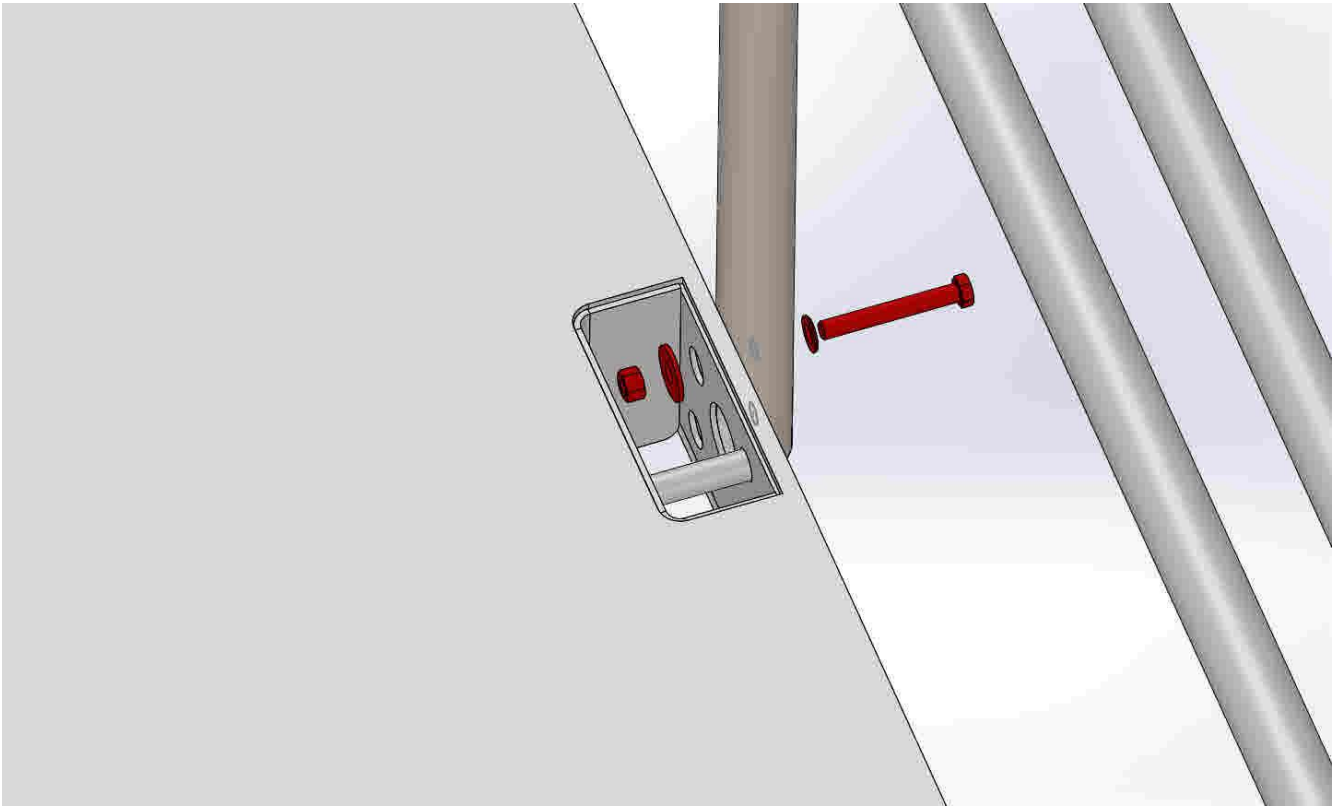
Installation of ramps, M12 x 90 hexagon bolts, M12 washers, M12 wing repair washers, and M12 hexagon nuts.
